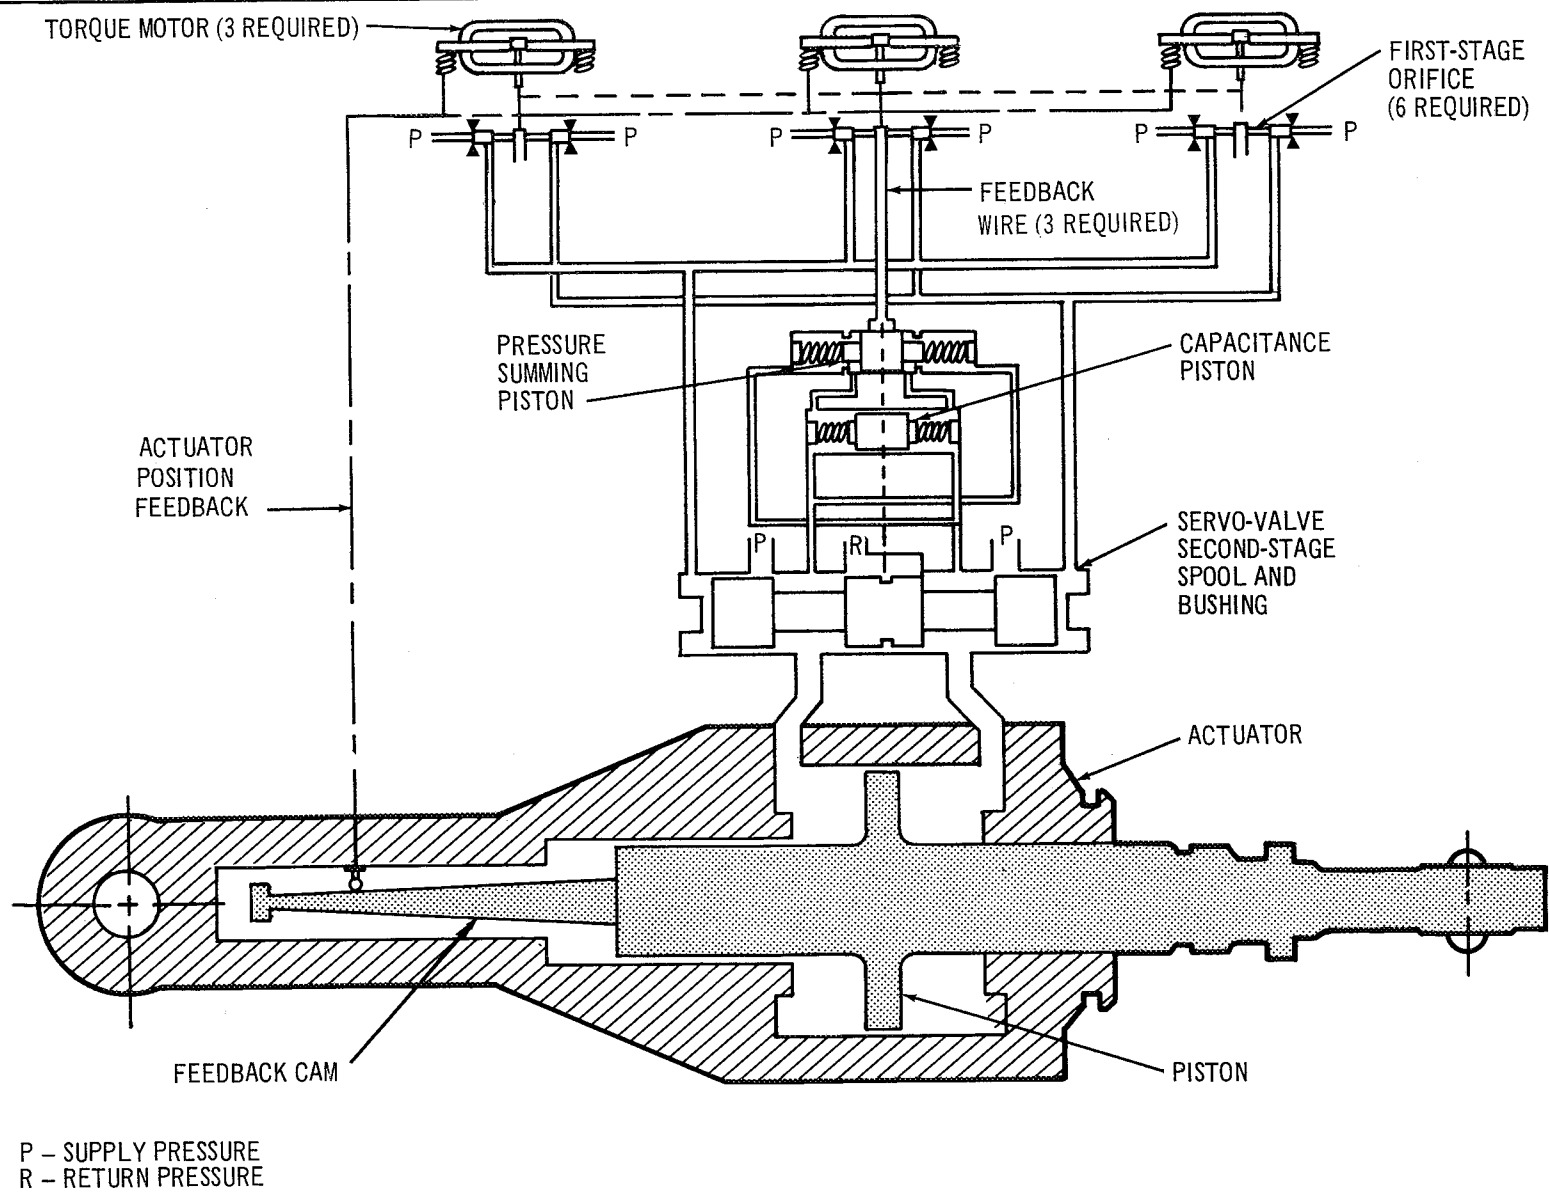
Schematic of Hydraulic Servo-Actuator Assembly
